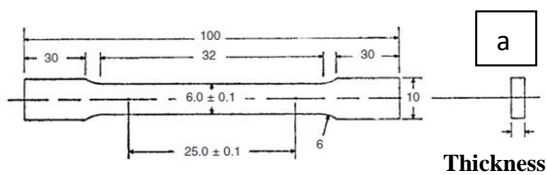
a) Dimensions of the tensile test specimen according to ASTM E 8 standard (in millimeters).
